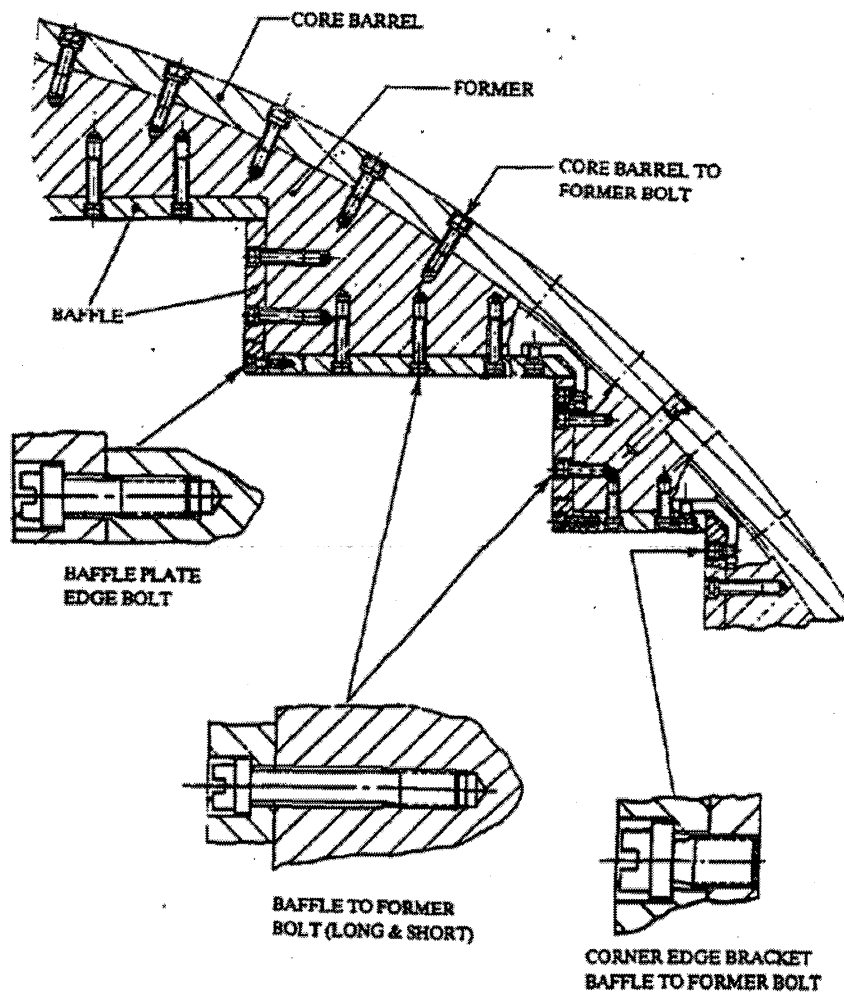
Bolting in a Typical Westinghouse Baffle/Former Structure
